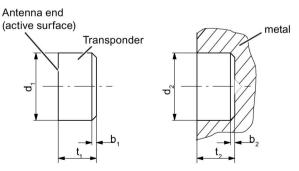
Flush-mounting of MDS D421/D521/E623 in metal with tools
